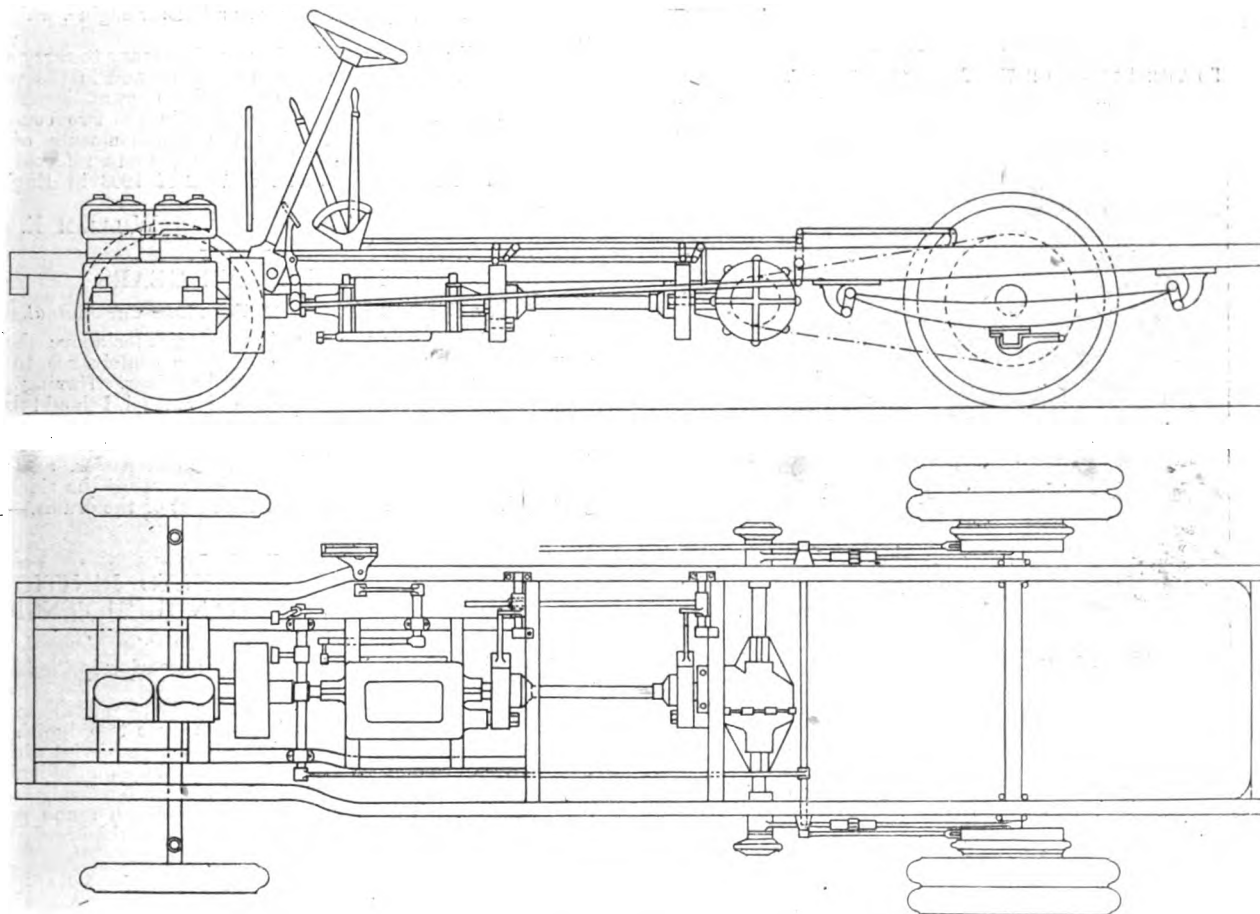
and 36.—Elevation and Plan of Chassis of Jackson 24-30-h.p. Motor-Bus.
